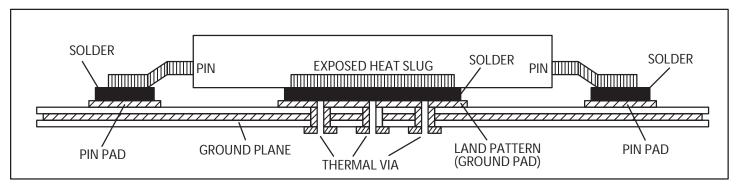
ASSEMBLY FOR EXPOSED PAD THERMAL RELEASE PATH -SIDE VIEW (DRAWING NOT TO SCALE)
